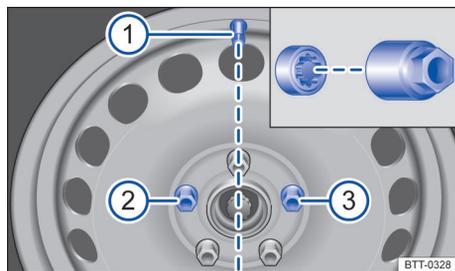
Wheel change: Tyre valve ① and installation position of the anti-theft wheel bolt ② or ③.
